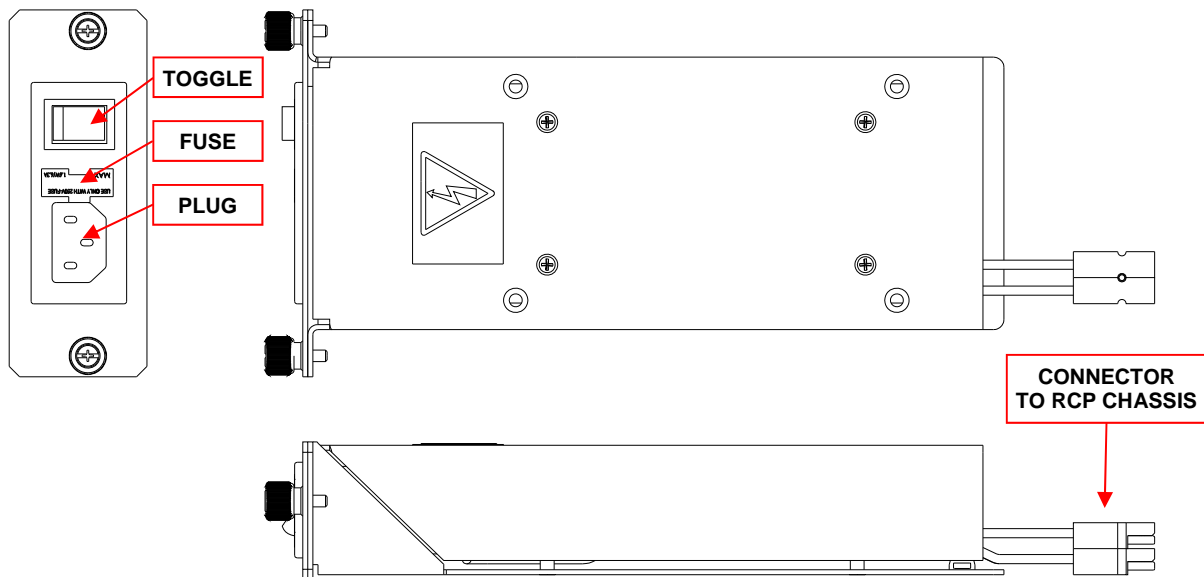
Outline Drawing, Removable AC Power Supply Module
